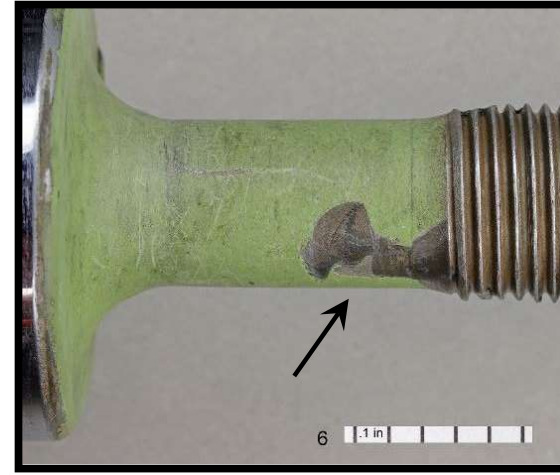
Detailed view of Tee Bolt shank-6 o'clock position.
